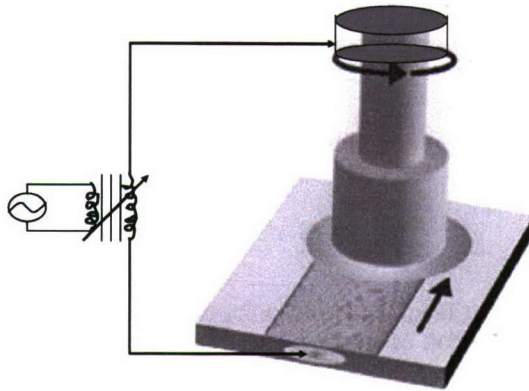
Schematic Illustration of Conventional Friction Stir Welding Tip with Auxiliary Electric Circuit for Supplemental Heating.
